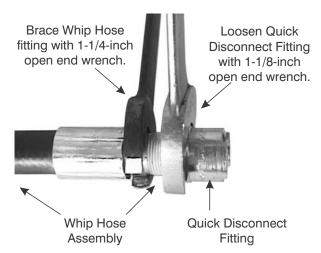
Secure the Q.D. Fitting to the Whip Hose fitting.
